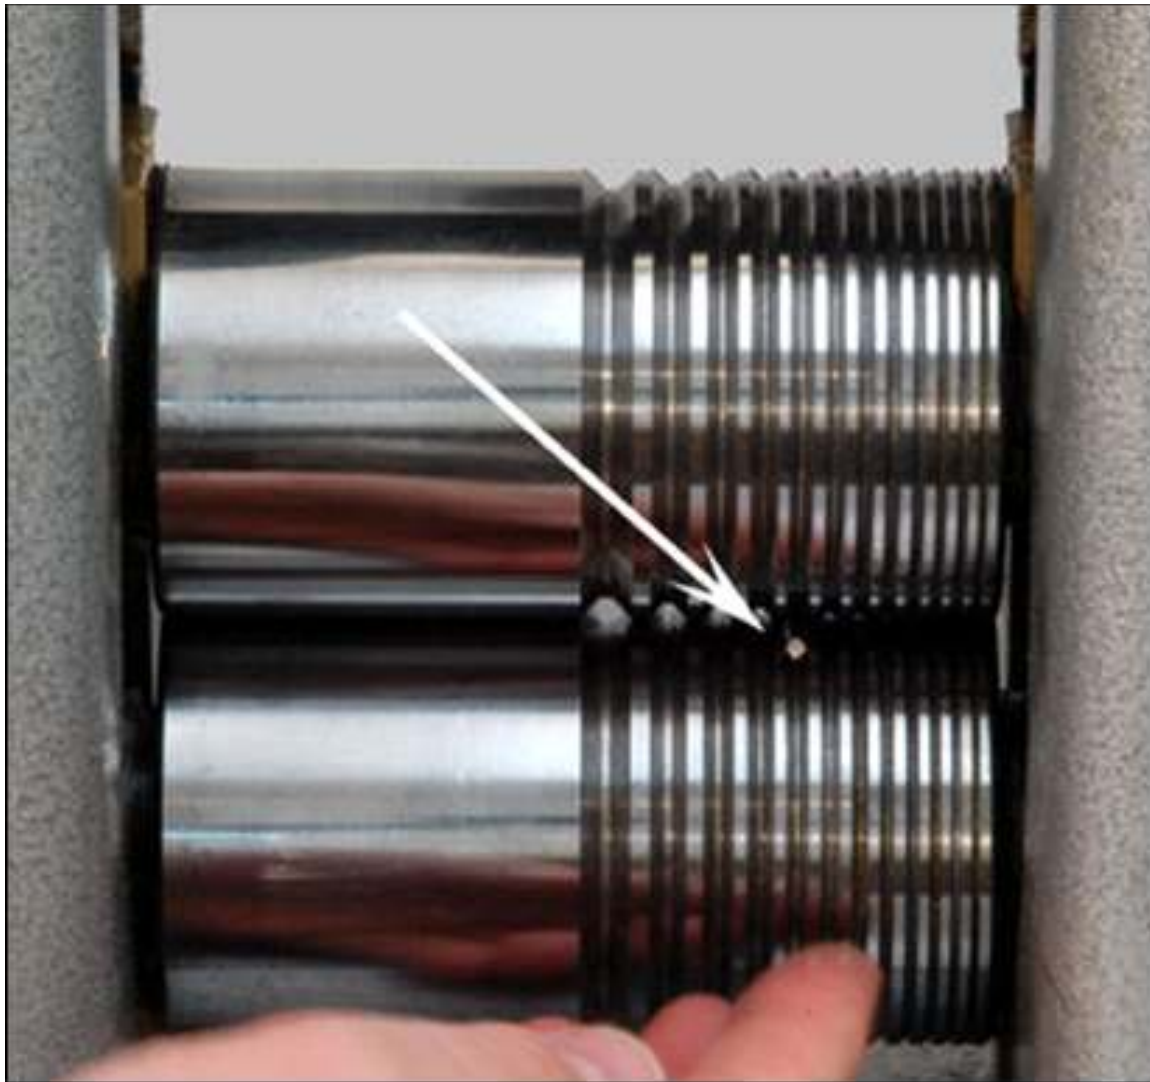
Rolling mill – 22 to 24 Gauge thickness square wire
